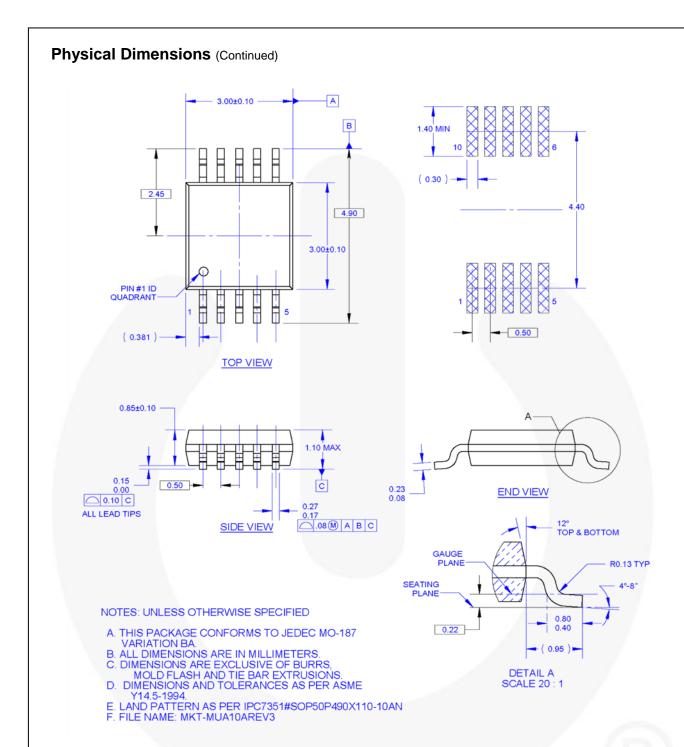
10-Lead, Molded Small Outline Package (MSOP)
